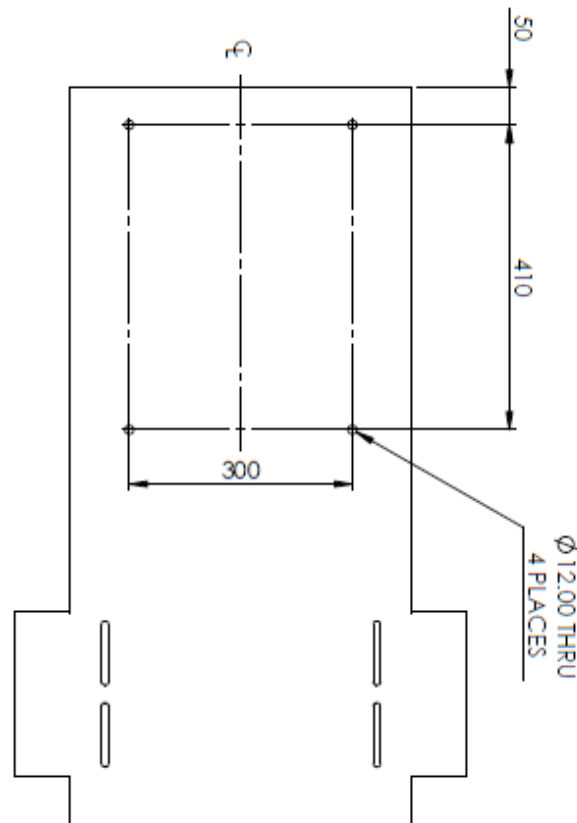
Wall mount bracket, bolt drilling hole alignment template - accessories insert.
